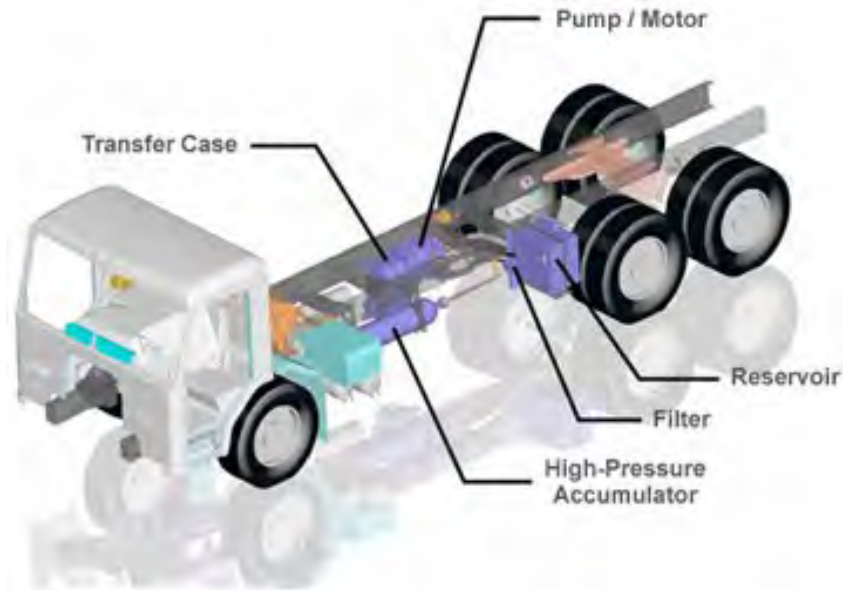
Hydraulic Hybrid Component Chassis Locations (Courtesy of Eaton Corp.)
